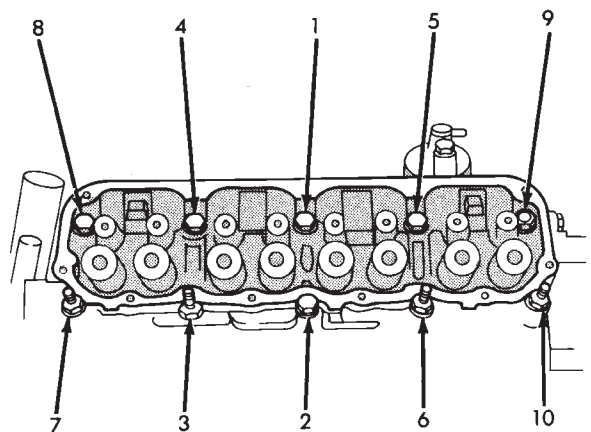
Engine cylinder head Bolt Tightening Sequence
